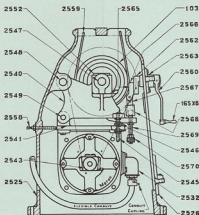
End View Drawing Showing Position of Parts of Underneath Belt Motor Drive Unit in Assembly.
